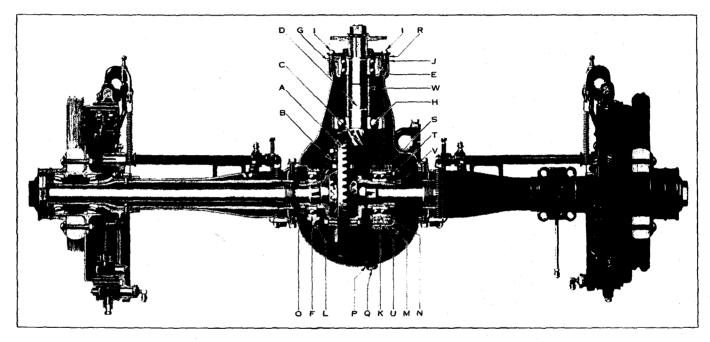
V-63 Ball Bearing Type Rear Axle
